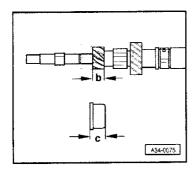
Allocation of 1st speed gear and cylinder roller bearing inner race
